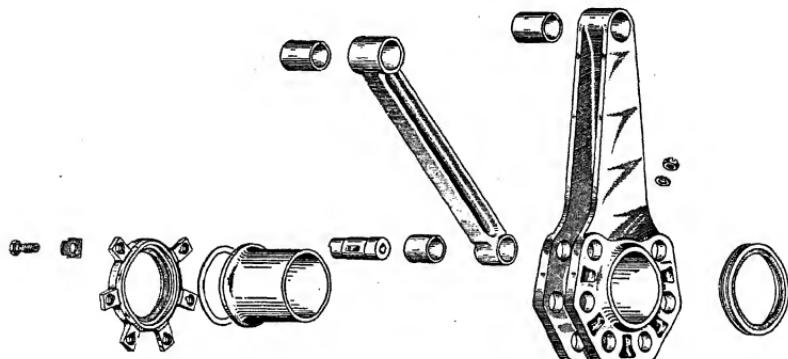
Front master rod, articulated, or link, rod, and end seal assembly.
